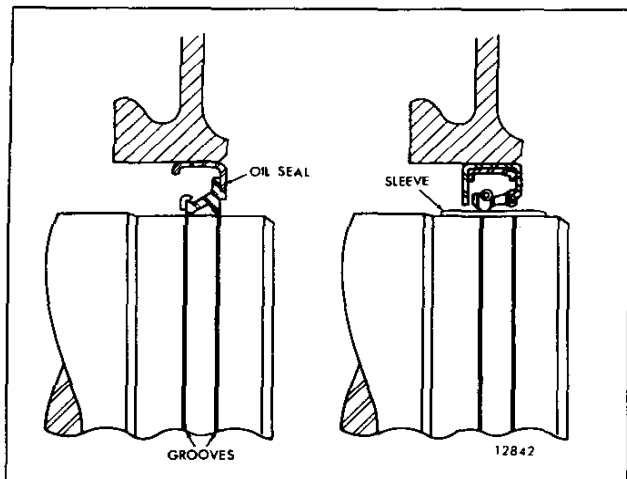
Use of Rear Oil Seal Sleeve on Grooved Crankshaft (In-line and 6V-53 Engines)
